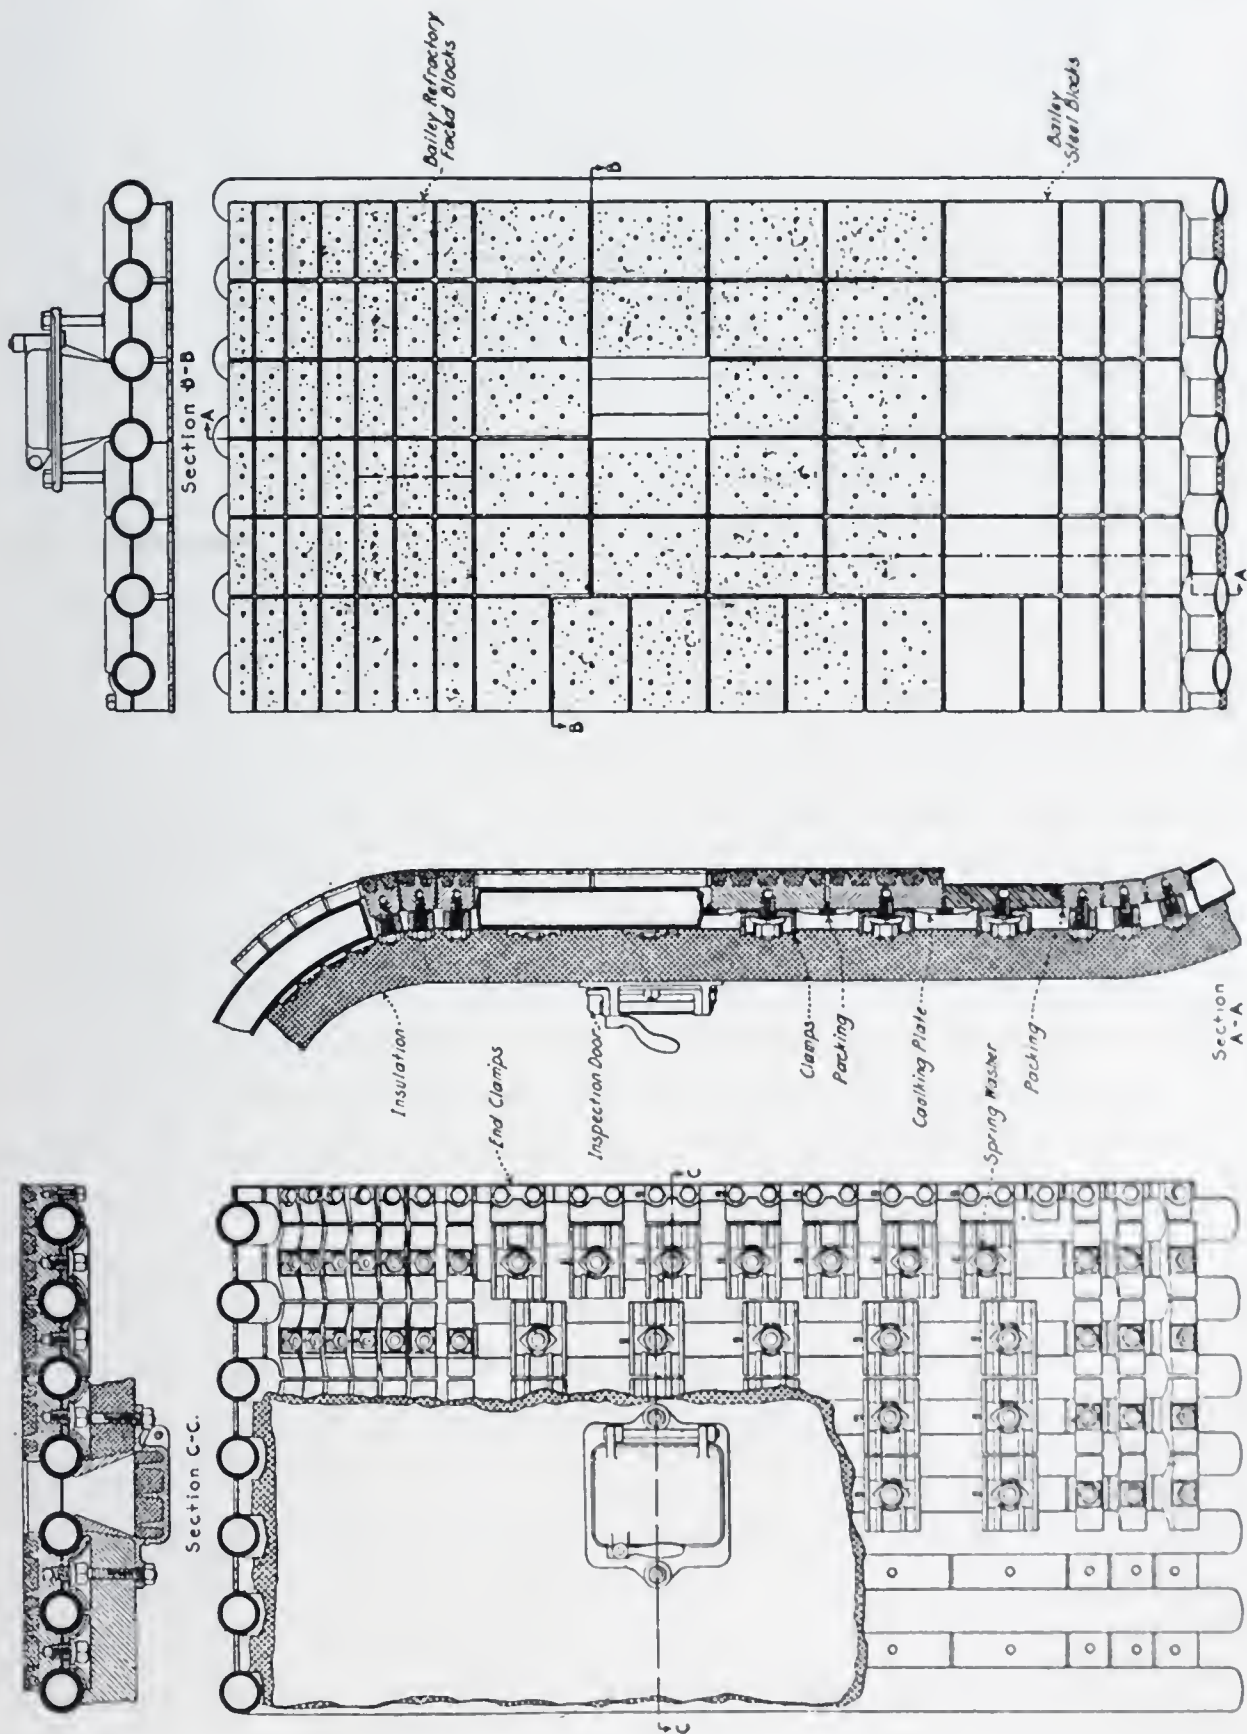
Bailey Wall and Floor Construction Used in Furnace of Calumet Boiler Shown in Fig. 9.
